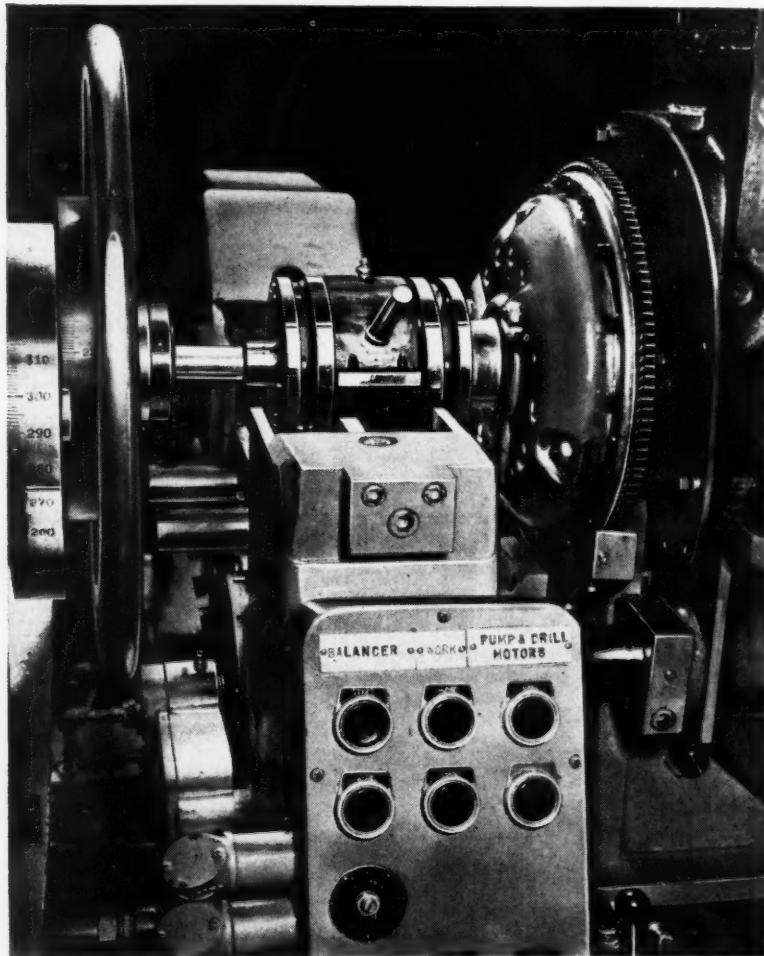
Torque from a constant-speed electric motor is transmitted to the engine crankshaft through the flexible couplings shown
